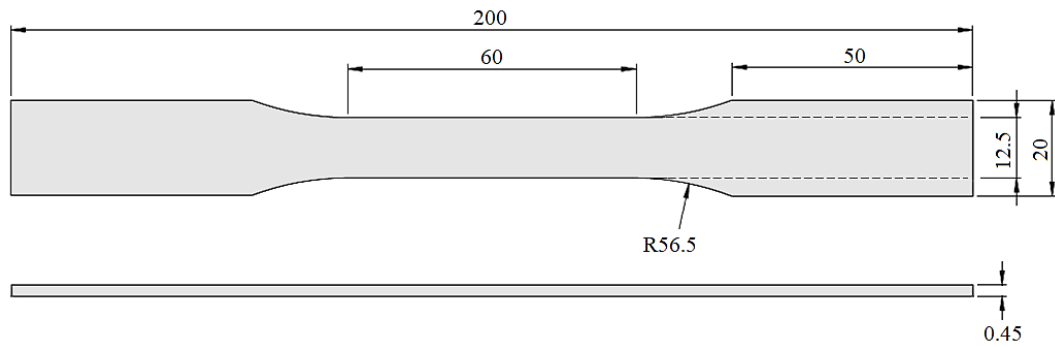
Steel tensile test specimen. All dimensions are in mm, not to scale.
